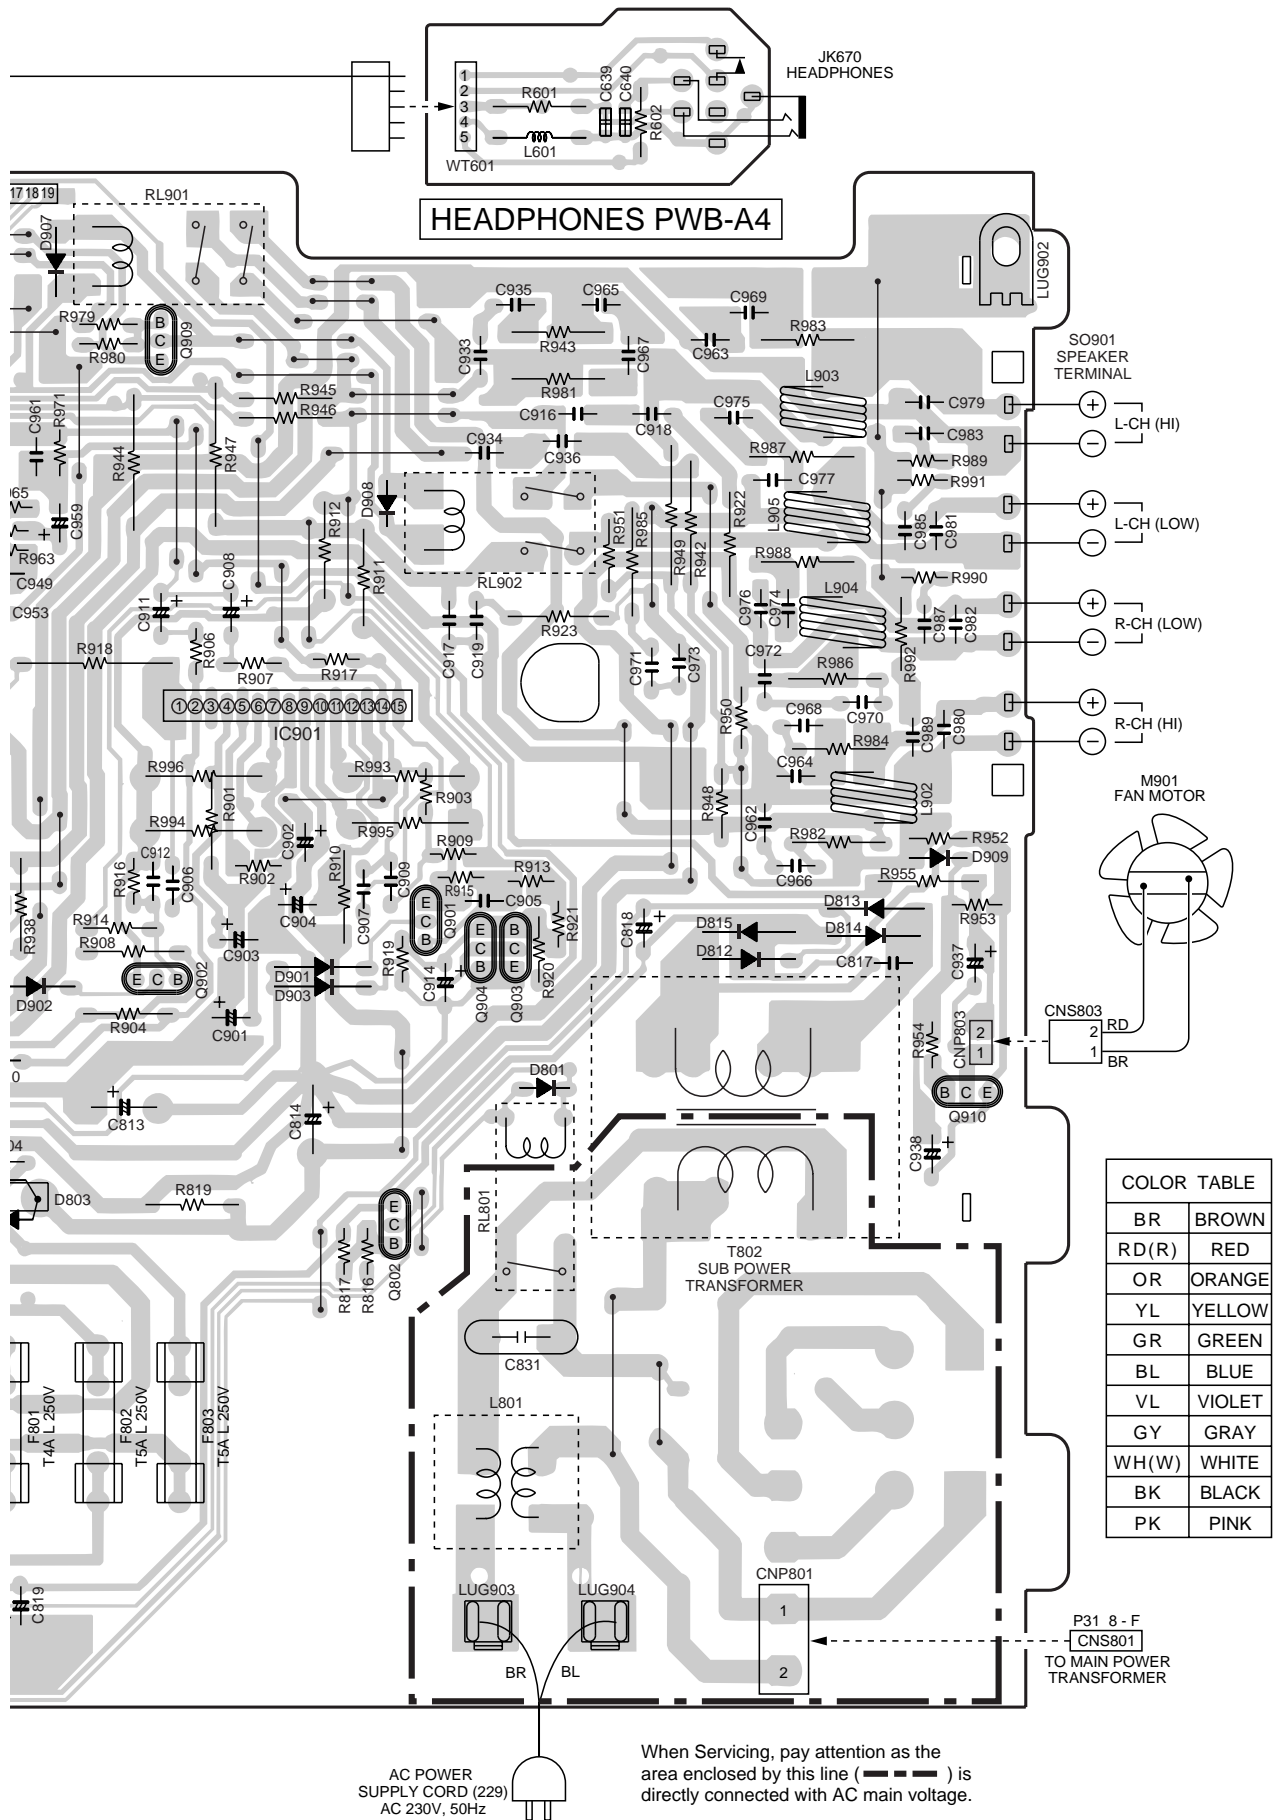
WIRING SIDE OF P.W.BOARD (6/8)
